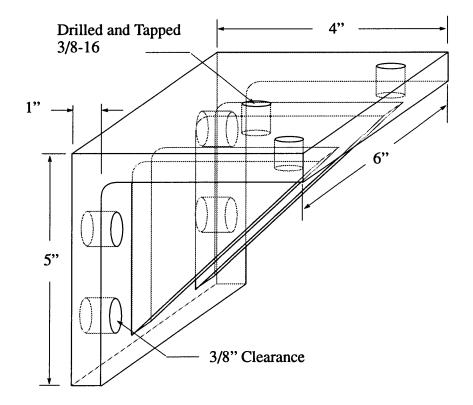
The Probe Clamp Mounting Bracket is an off-the-shelf flanged cast iron angle bracket with mounting holes drilled in it. The tapped holes are reinforced with Helicoil inserts.
